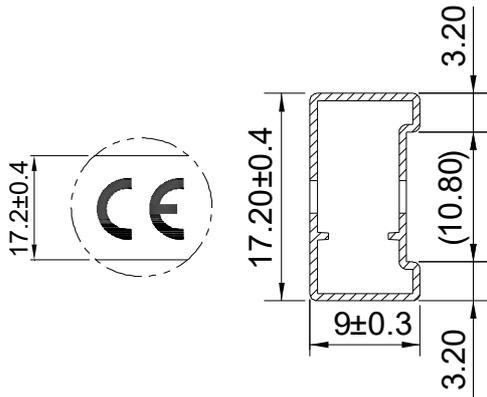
SIL Packages Tube for EC1SA0xN and EC1SA1xN
